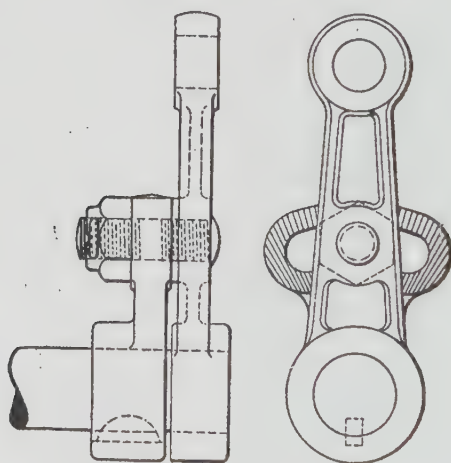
BRAKE LEVER ADJUSTMENT.
